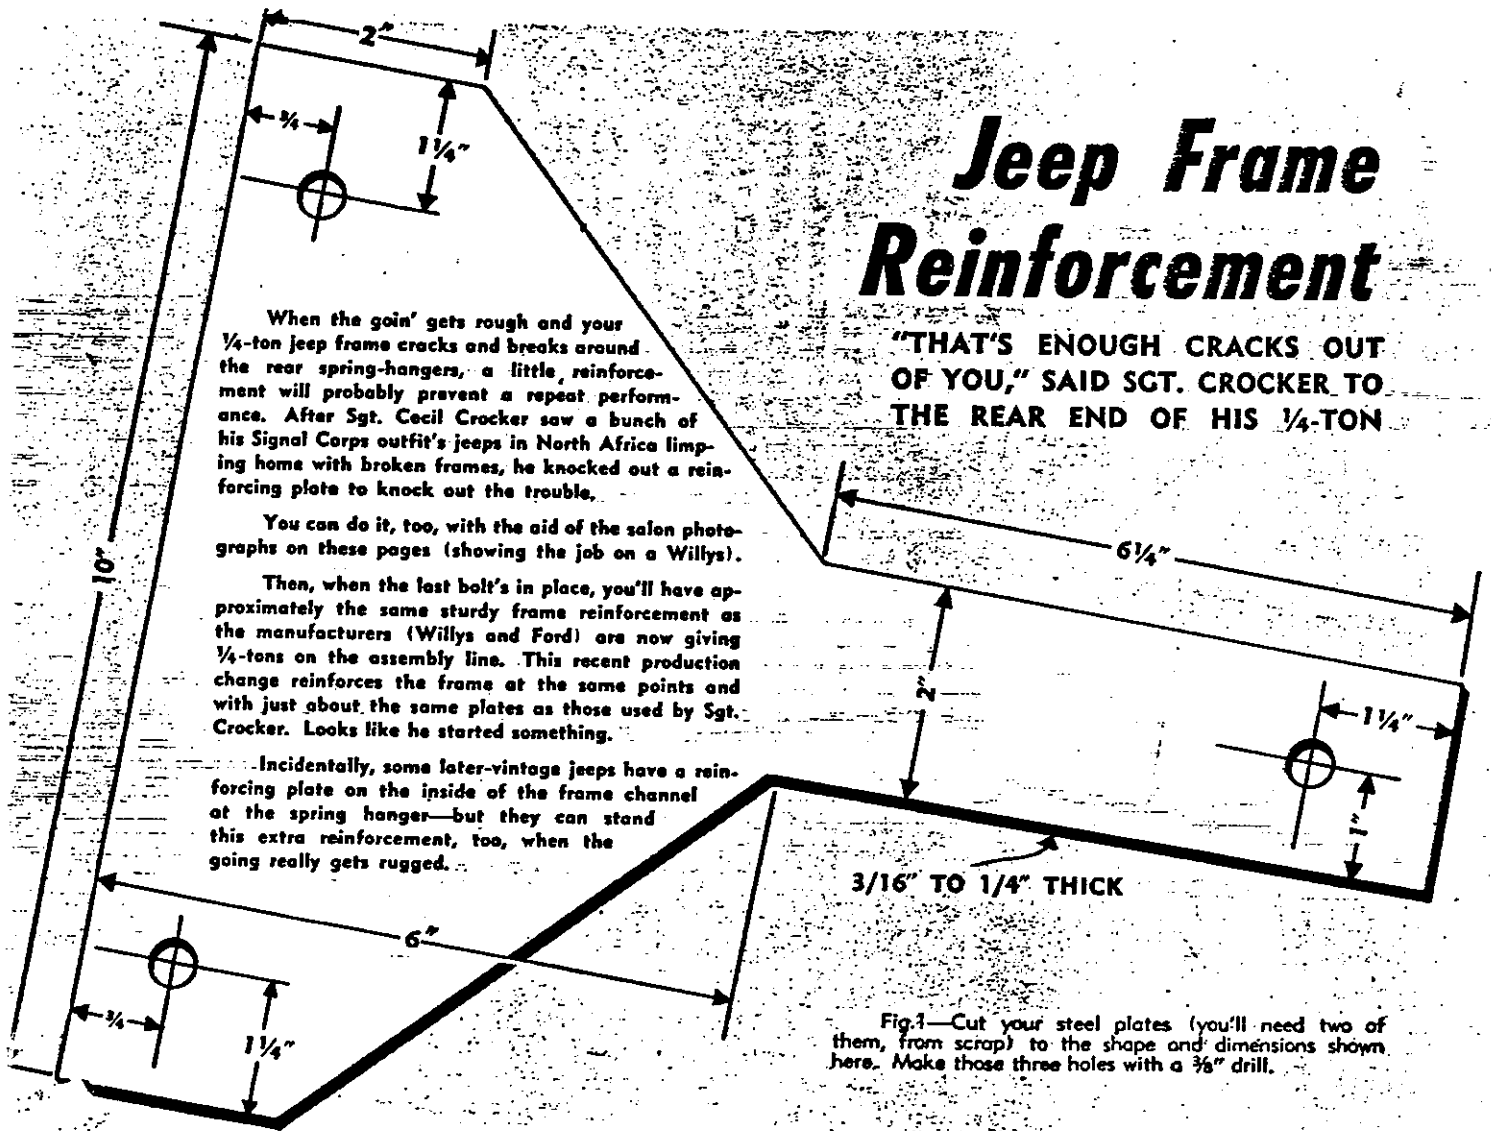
Cut your steel plates (you'll need two of them, from scrap) to the shape and dimensions shown here. Make those three holes with a 3/8" drill.
